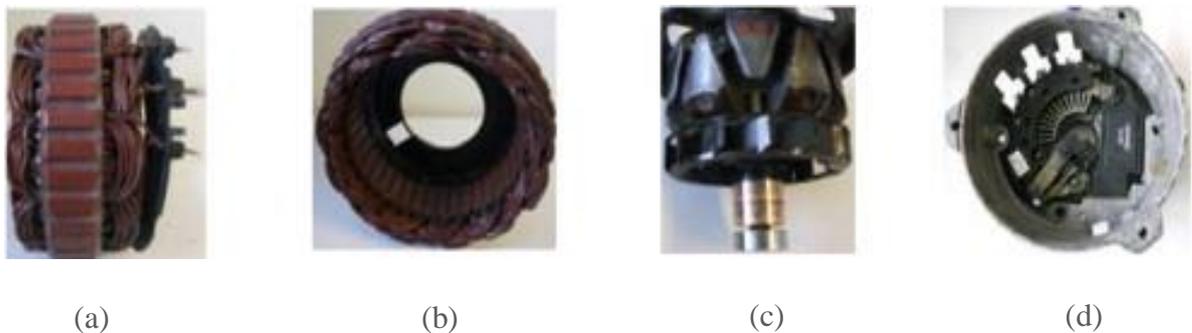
Car alternator construction: a) Three-phase stator (armature) arrangement - side view; b) Stator arrangement – internal view; c) Claw-pole rotor core and excitation winding embedded between claw poles; d) Generator frame (Autocar-inspection blog, 2020)
